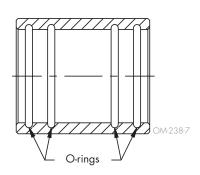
SLIP COUPLING WITH O-RINGS AND NO SHOULDER
